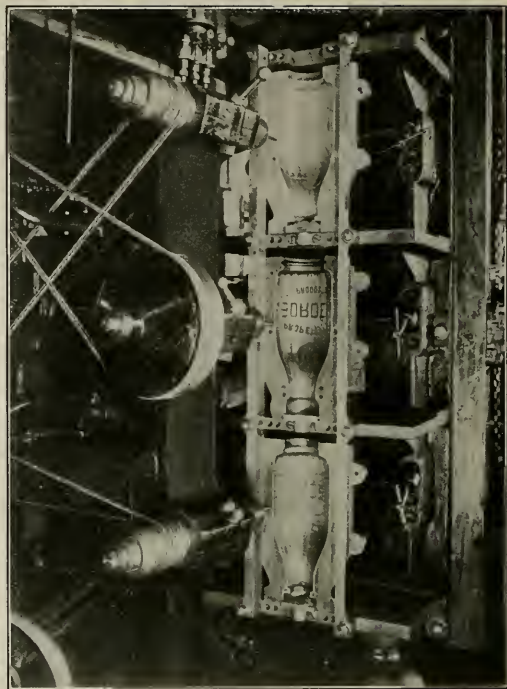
PORTION OF BOTTLE-MOLD OR CORE-BOX MACHINE
